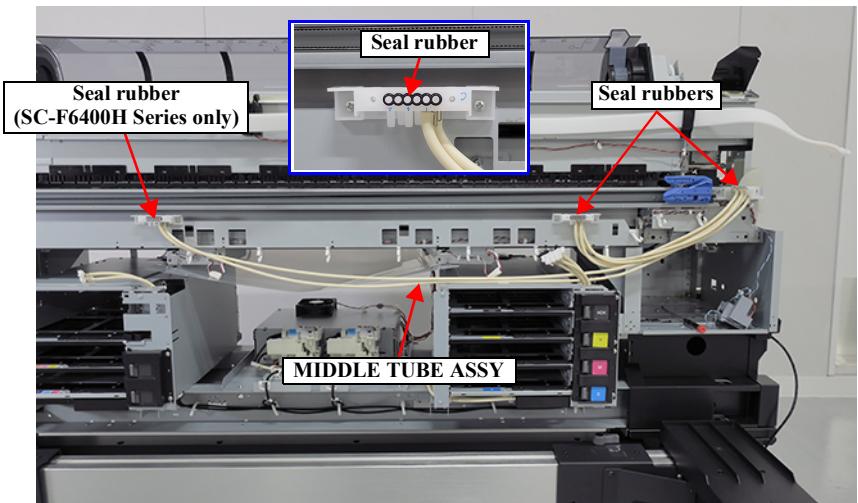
Removing the MIDDLE TUBE ASSY (3)
